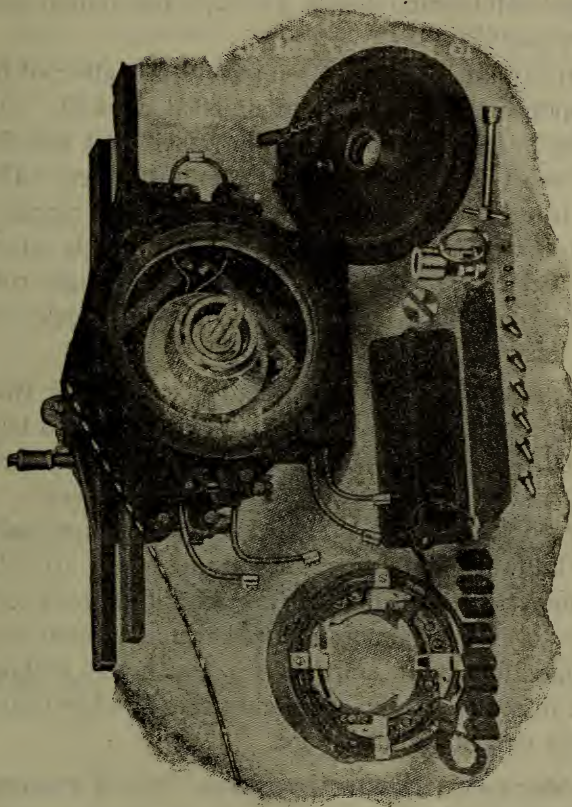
END VIEW OF GENERATOR SHOWING BEARING HEAD AND HAND HOLE COVER REMOVED, EXPOSING ARMATURE, COMMUTATOR, BRUSH MECHANISM AND FIELD COILS.
